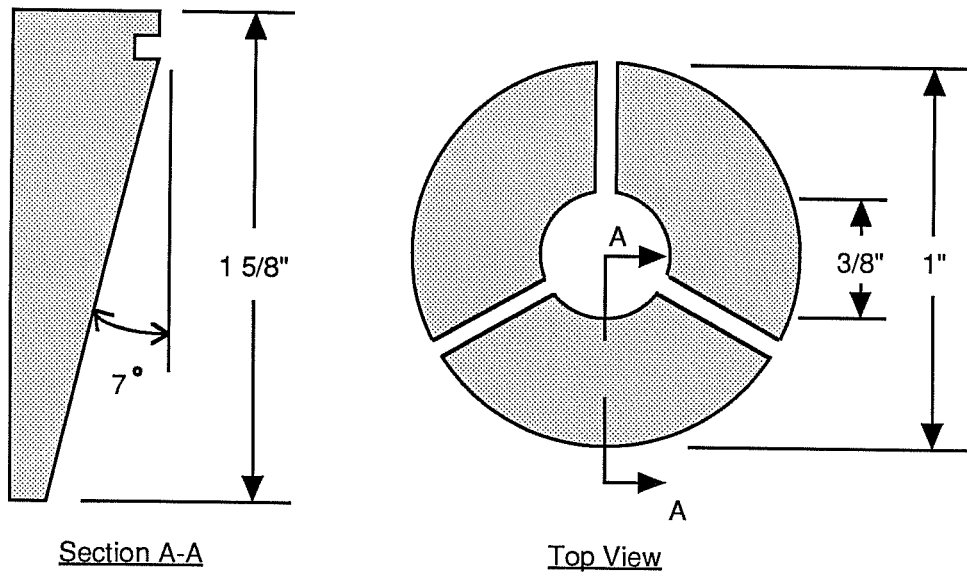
Three Piece Copper Wedge Used in the Primary Chuck.
